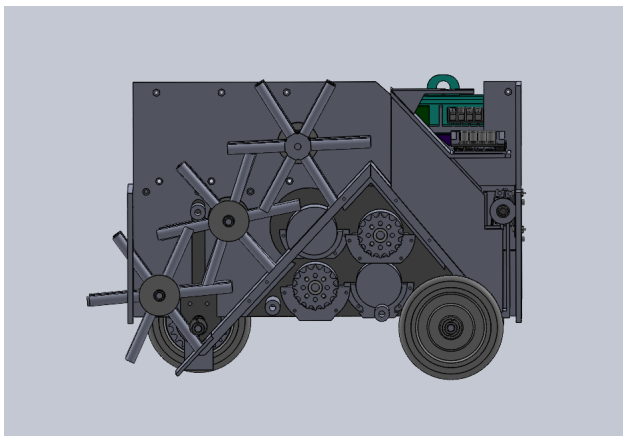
CAD of inside view showing ramp structure and spindle arrangement.
